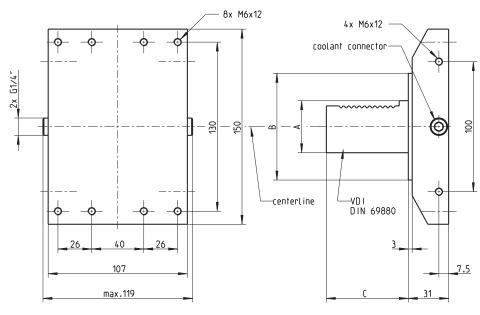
Machine adapter with straight shank for disk-type turret with VDI tool holding fixture Type 9129AB...
